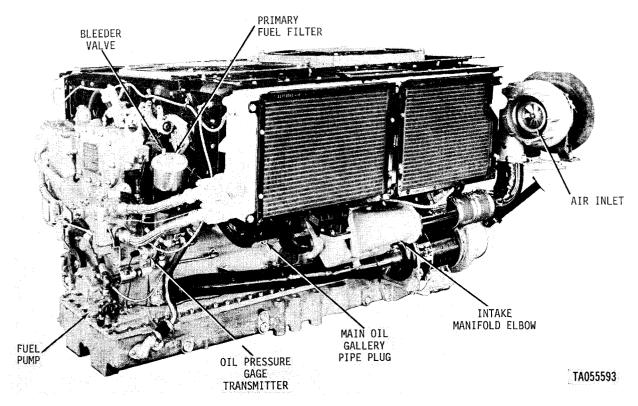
Engine connection points-right front view, model AVDS-1790-2DR engine.
